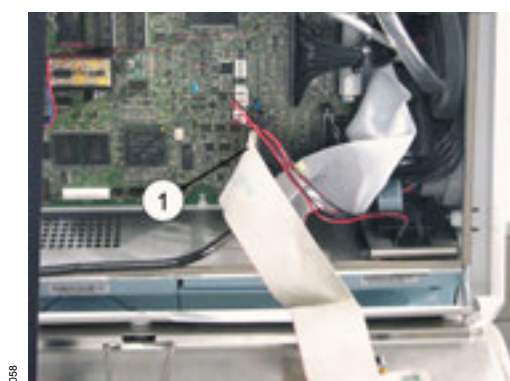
Detail view of Central Control Board: Cable connector (ribbon cable)
